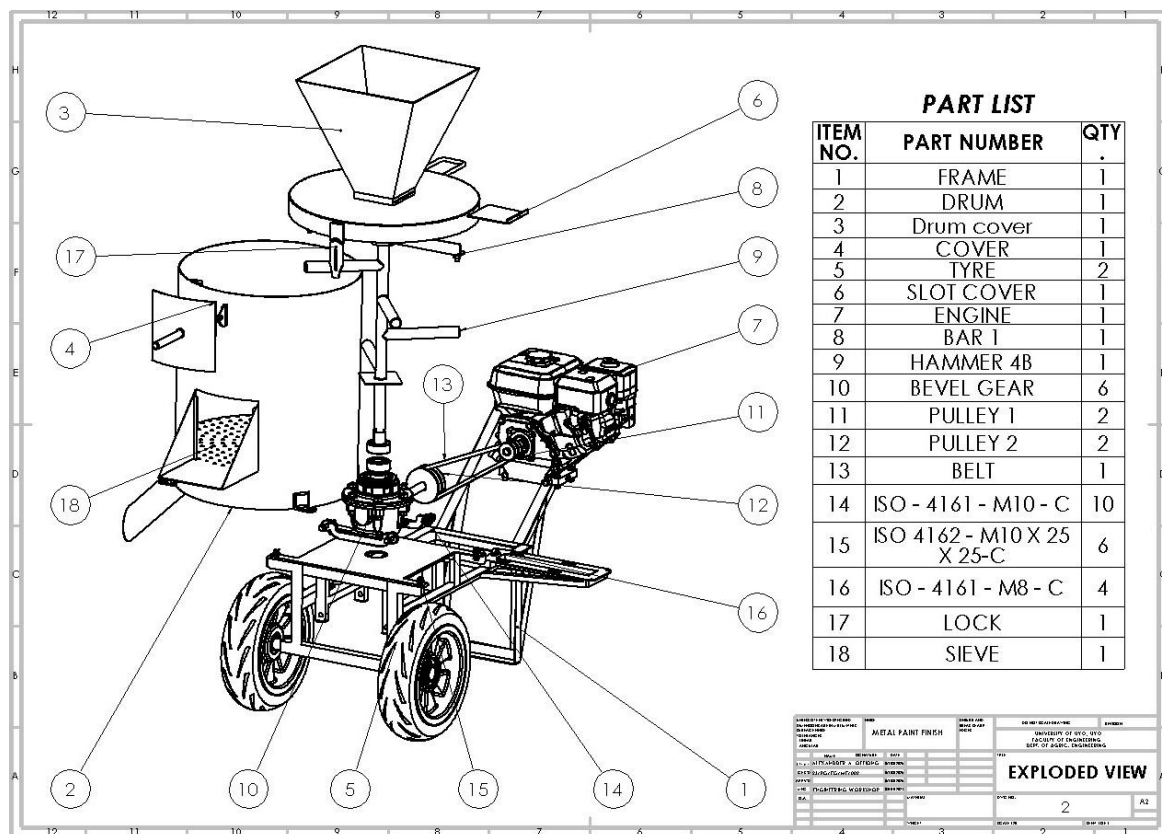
Exploded view of model drawing of the vertical palm fruit digestion machine by Reseracher (2025)
